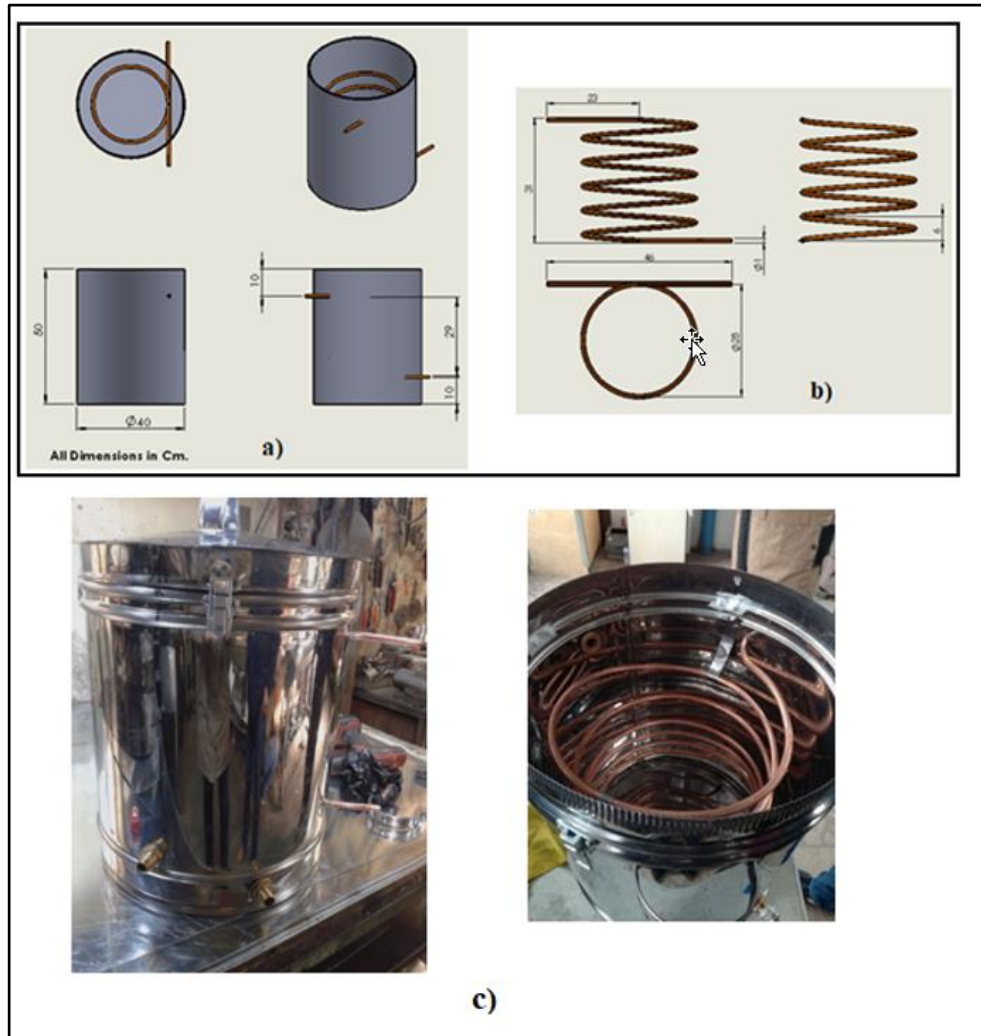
Storage tank: a) Tank assembly design, b) Coil heat exchanger design, c) Manufactured storage tank.
